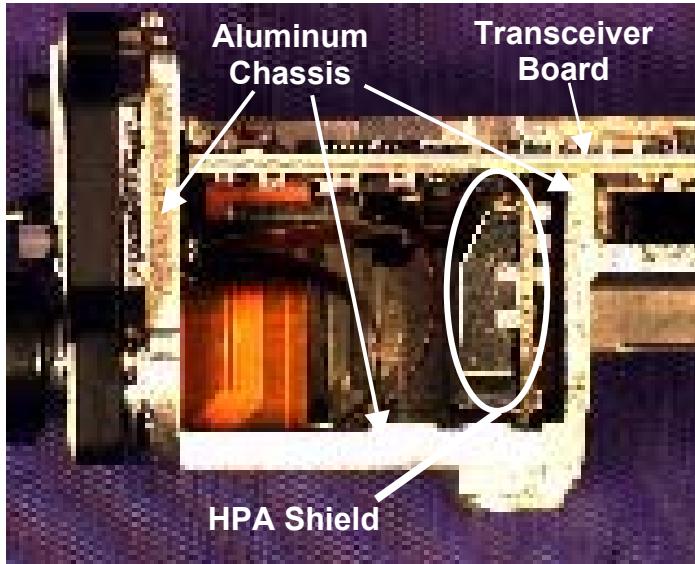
BV8P801T Close-up Cross-Section Photograph - HPA Board Shielding
